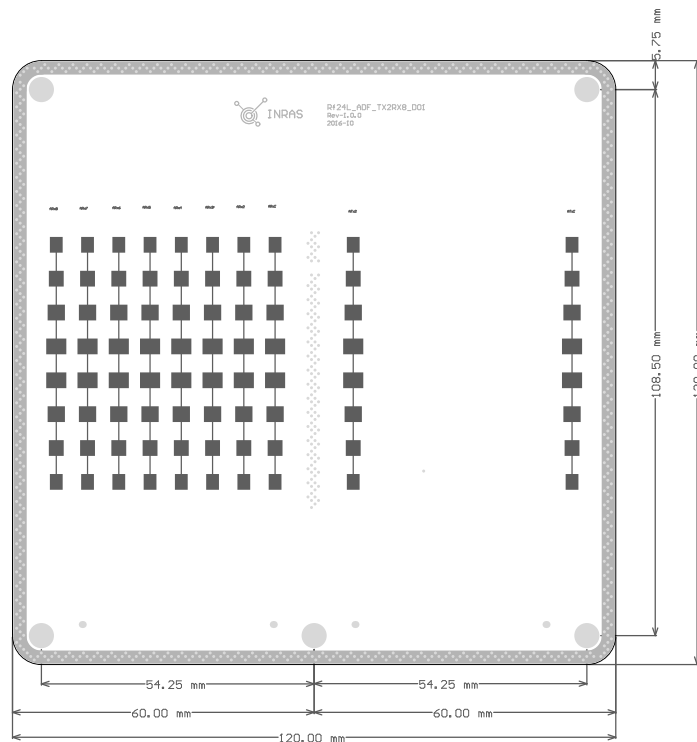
Dimensions of the 24-GHz frontend including the positions of the mounting holes.
